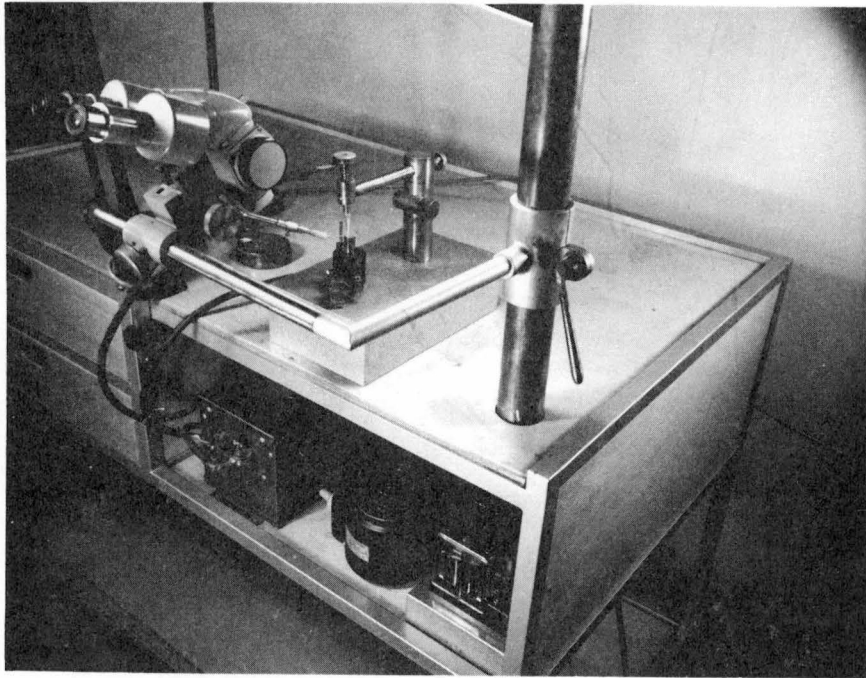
Spot-Welding Apparatus for Constructing Hot Wire Probes
